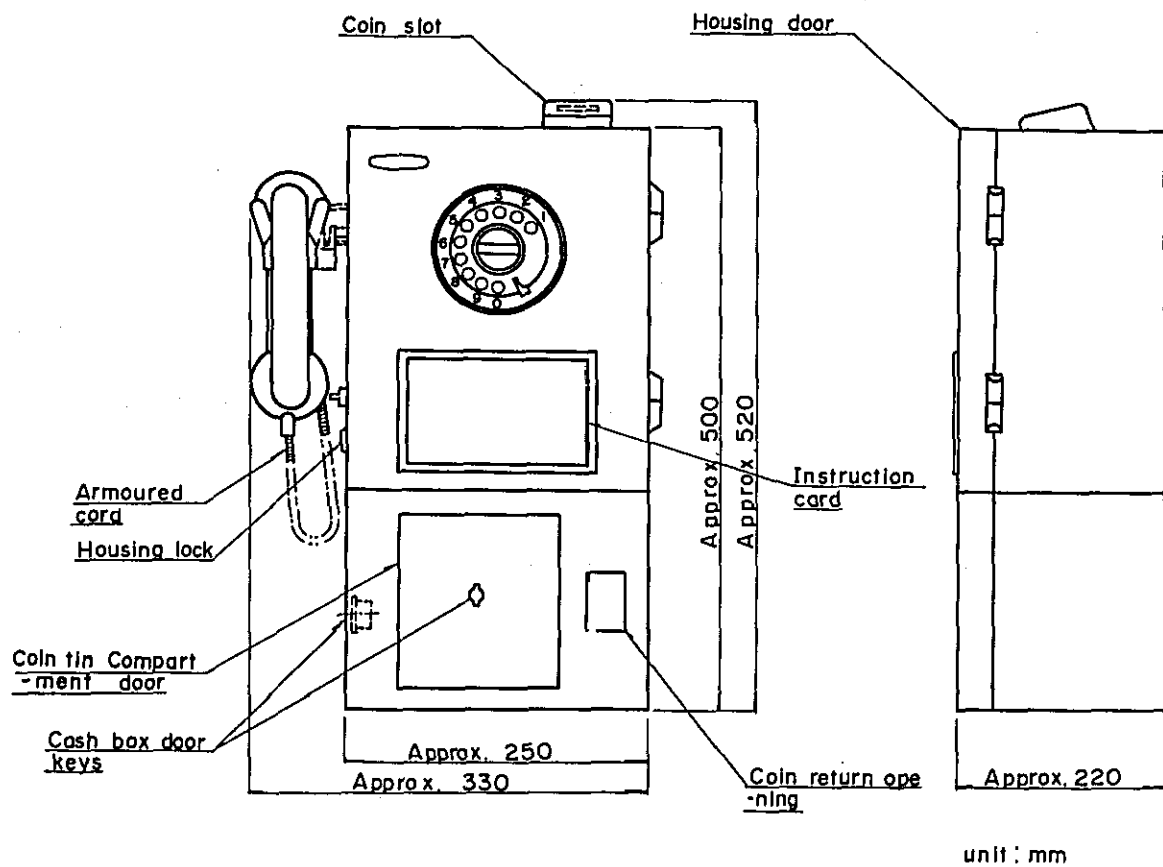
Typical Public Coin Box (Outdoor type)
